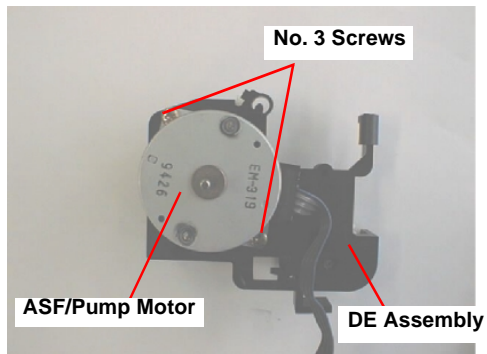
Removing the ASF/Pump Motor from DE Unit
